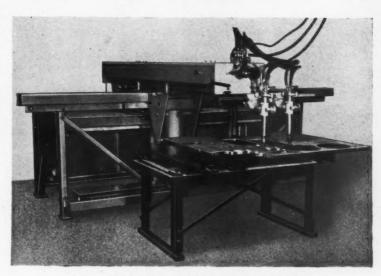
S.I.F. 75 Cutamatic oxy-flame cutting machine
